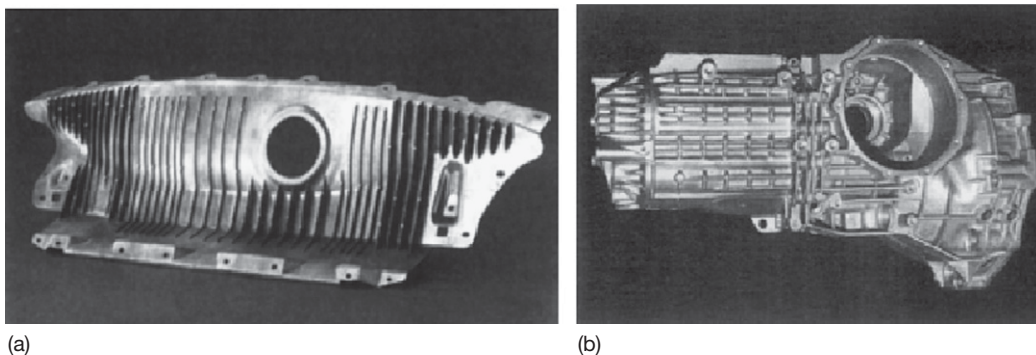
Applications of magnesium alloys in automobiles.¹²² (a) Fuel tank cover in Mercedes Benz and (b) gearbox housing in VW-Passat (Volkswagen AG).
